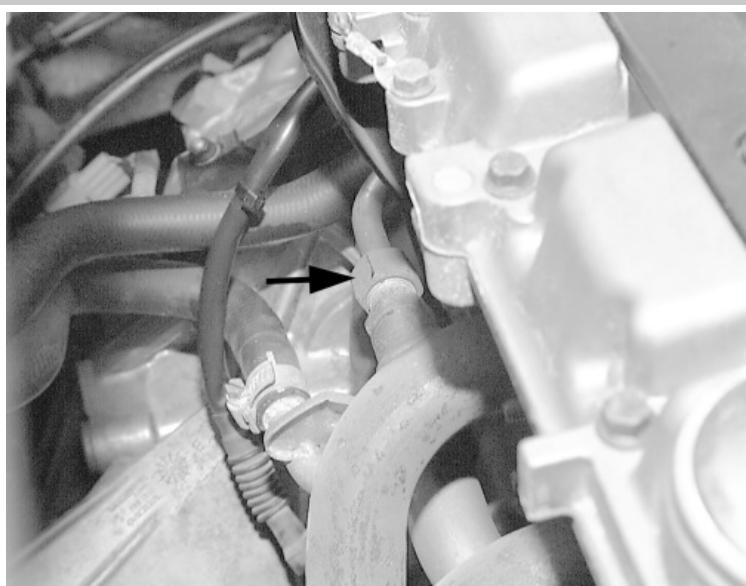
The EGR tube is connected on the drivers side of the manifold
